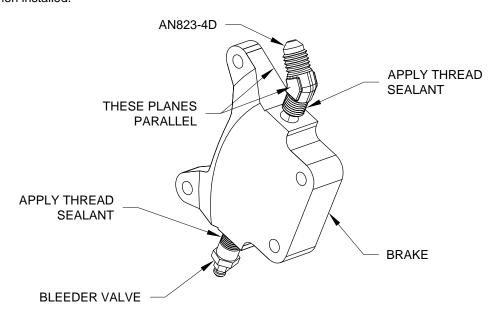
ADDING FITTINGS TO BRAKE ASSEMBLY (RIGHT SHOWN)
